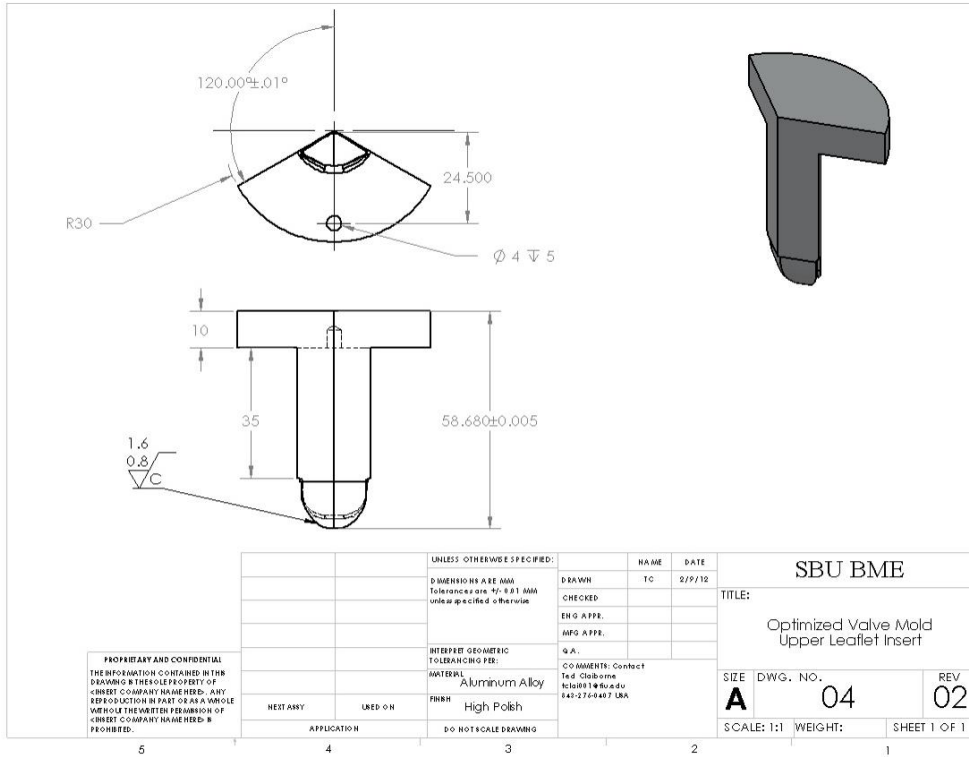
Engineering drawing of the optimized valve mold leaflet top.
